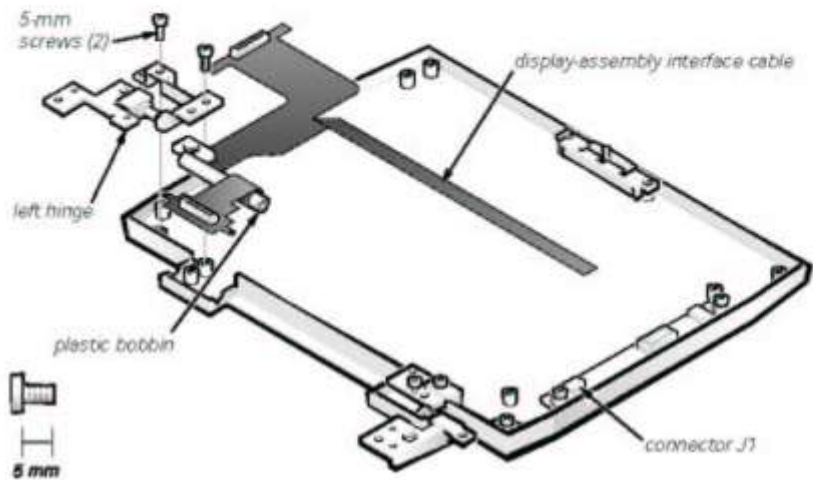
Display-Assembly Interface Cable Removal (12.1-Inch Display Shown)
